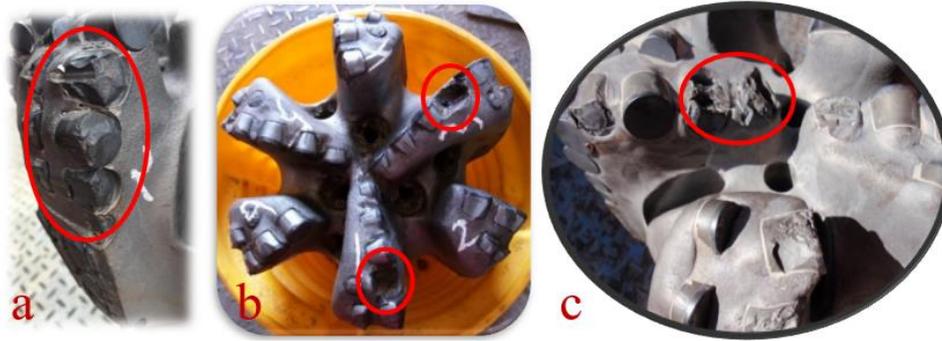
Failure modes of PDC teeth: (a) spalling of diamond layer; (b) tooth loss; (c) tooth fracture
